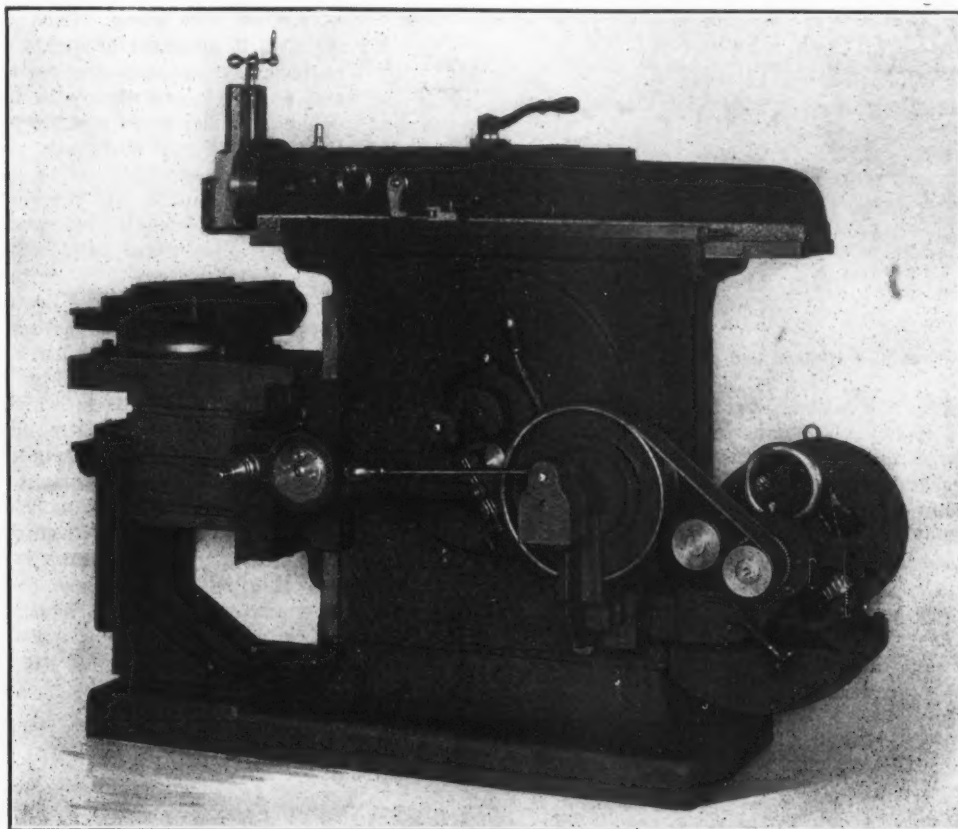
A 24-in. Shaper with Variable Speed Motor Drive.
